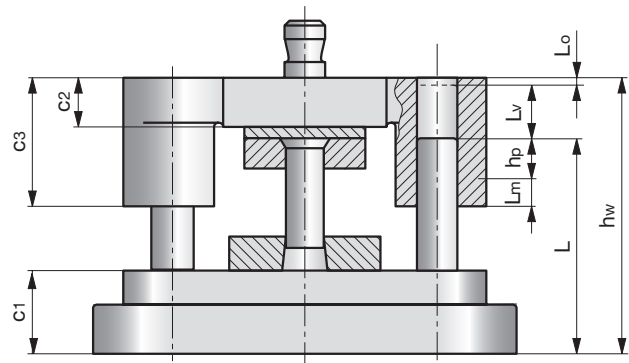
Overall height "h<sub>w</sub>" of the pillar guide tool when using clamping pins with threaded shank according to DIN ISO 10242-1.
